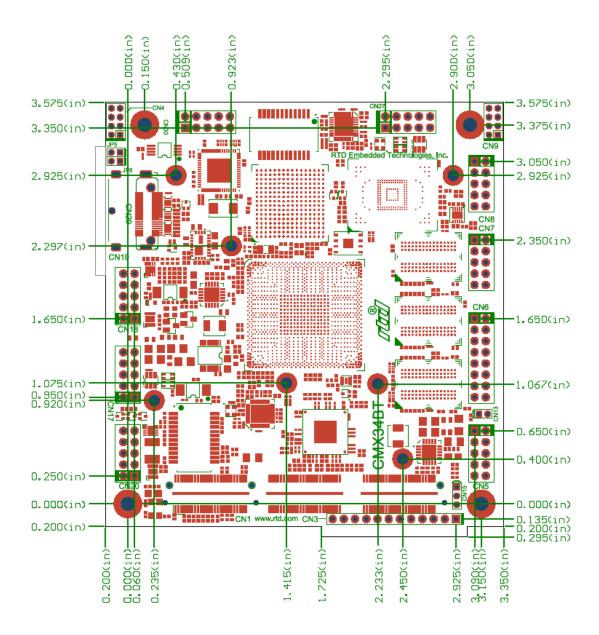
CMX34BT Physical Dimensions (±0.005 inches)
